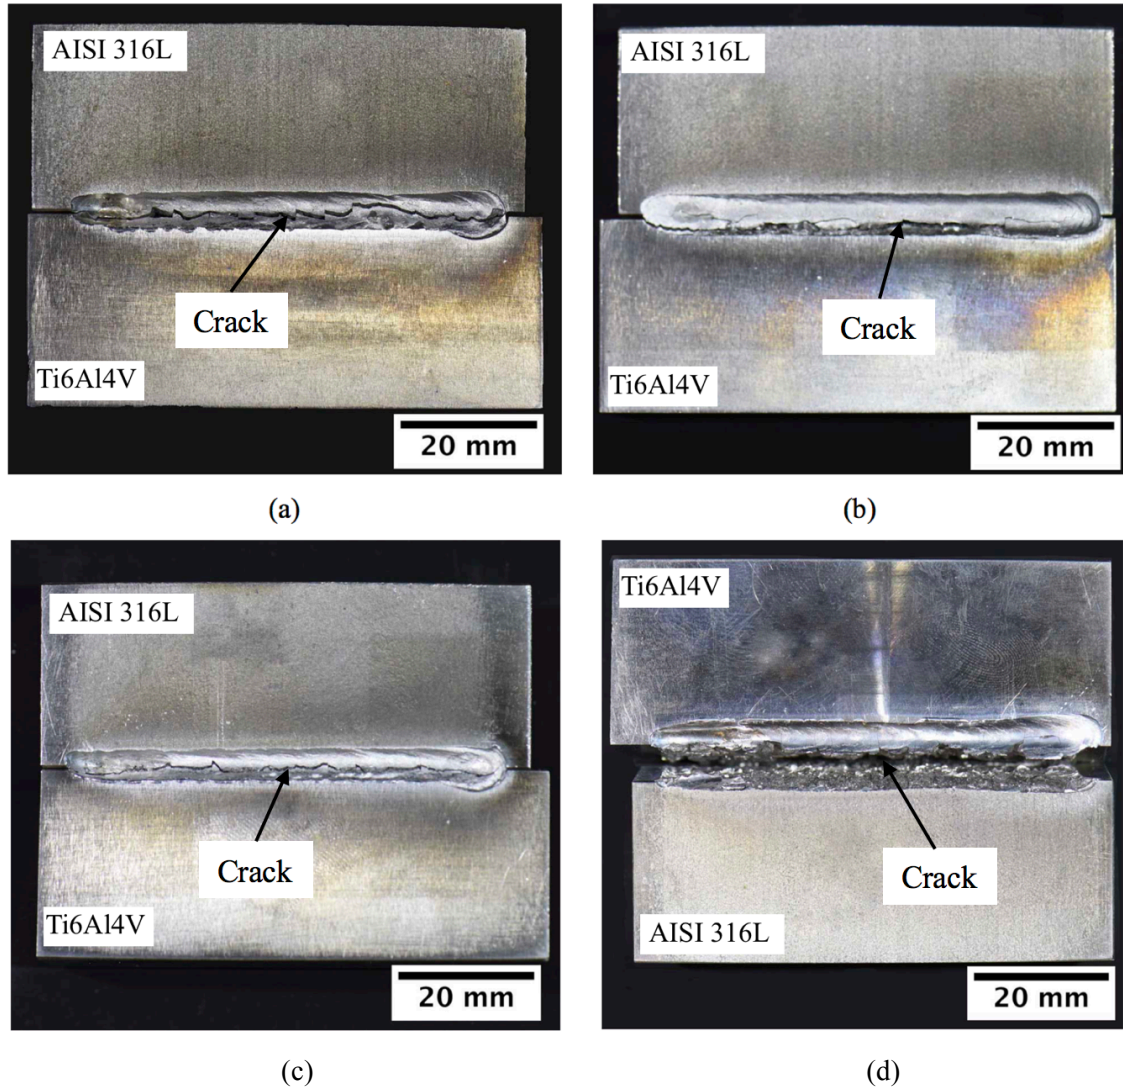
Ti6Al4V-AISI 316L autogenous weld surface (a) weld 1 (b) weld 3 (c) weld 4 (d) weld 5. The all welds showed crack at the weld bead. All welding parameters are listed in table 3.10.
